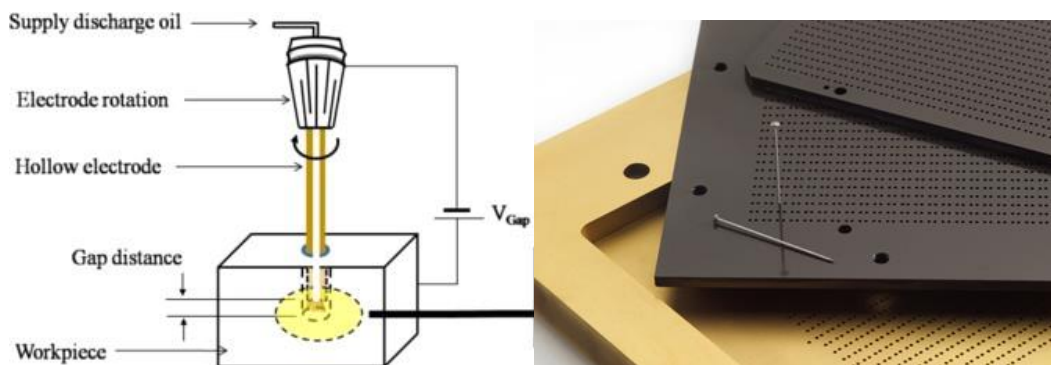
Schematic representation of EDM drilling and an example of machined holes.
